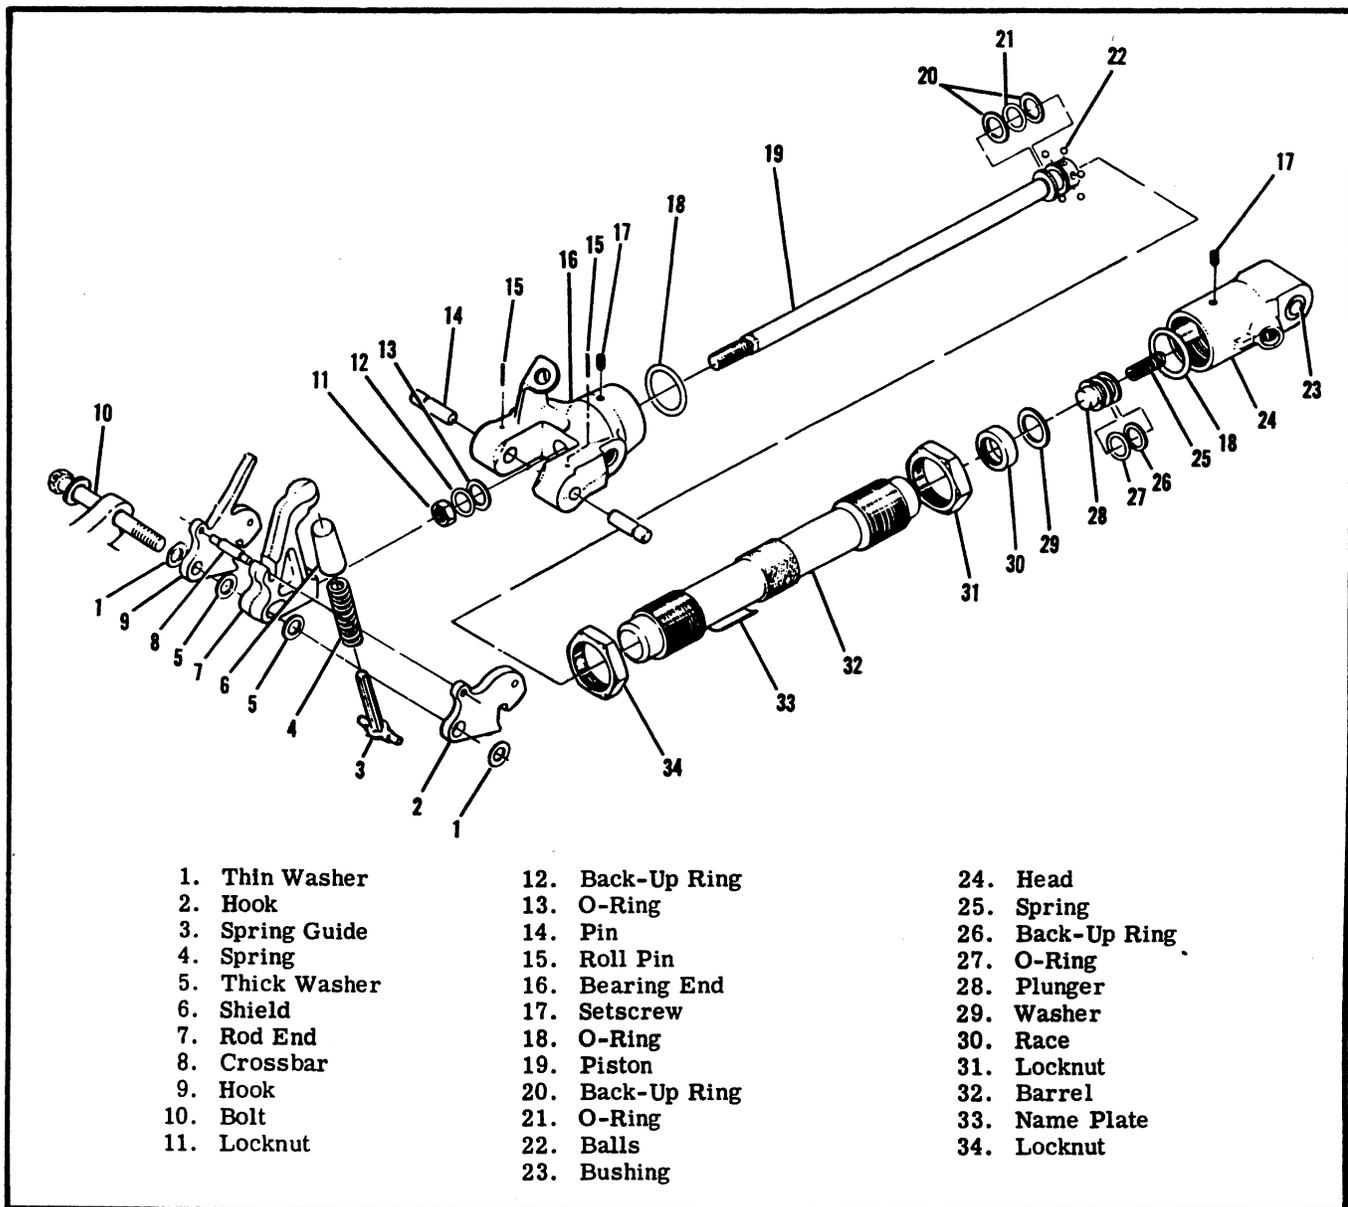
Nose Gear Actuator (Sheet 1 of 2)
